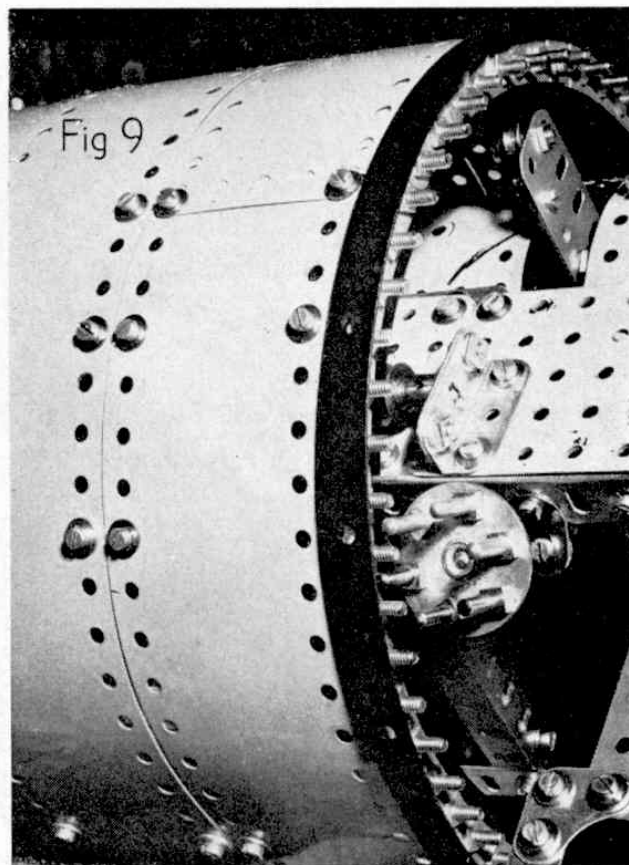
This giant winding drum is driven by one of the oldest gear principles known—peg gears. In this case the pegs are supplied by Bolts and Threaded Pins.
